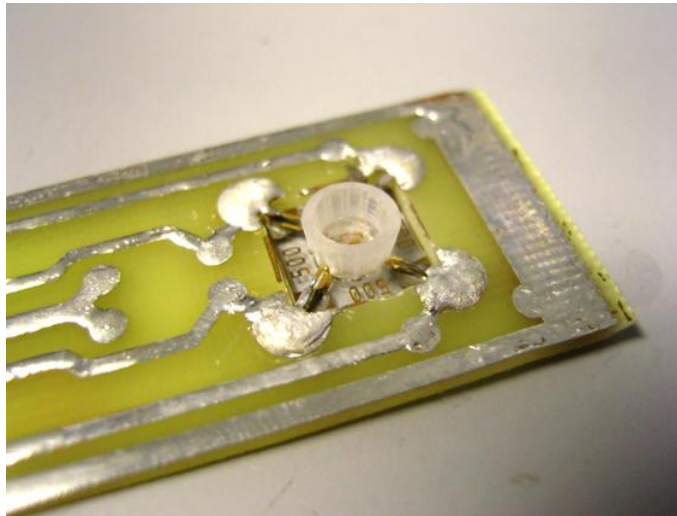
Detail of a PCB with the spring connectors soldered in place, the chip with the electrodes, and the chamber made from the crown of a 10 μ l pipette tip.
